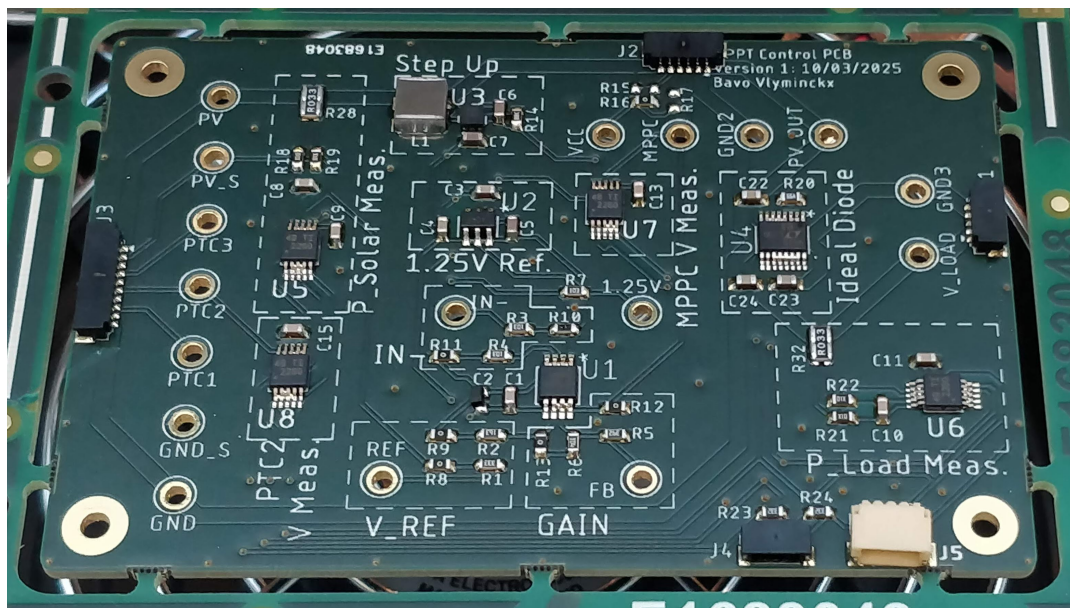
The Solar Cell PCB is soldered using a reflow oven.
